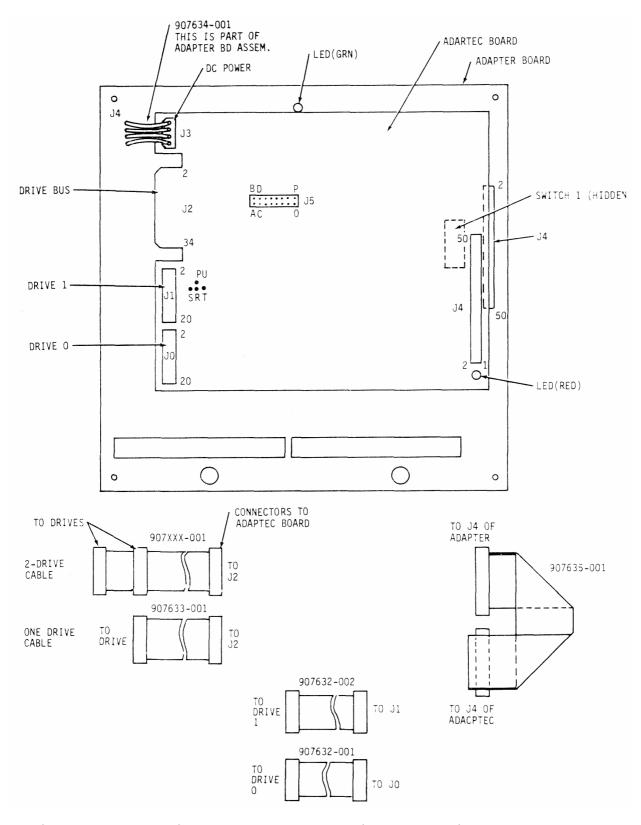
Location of Jumpers on the Winchester Drive Controller PCBA
